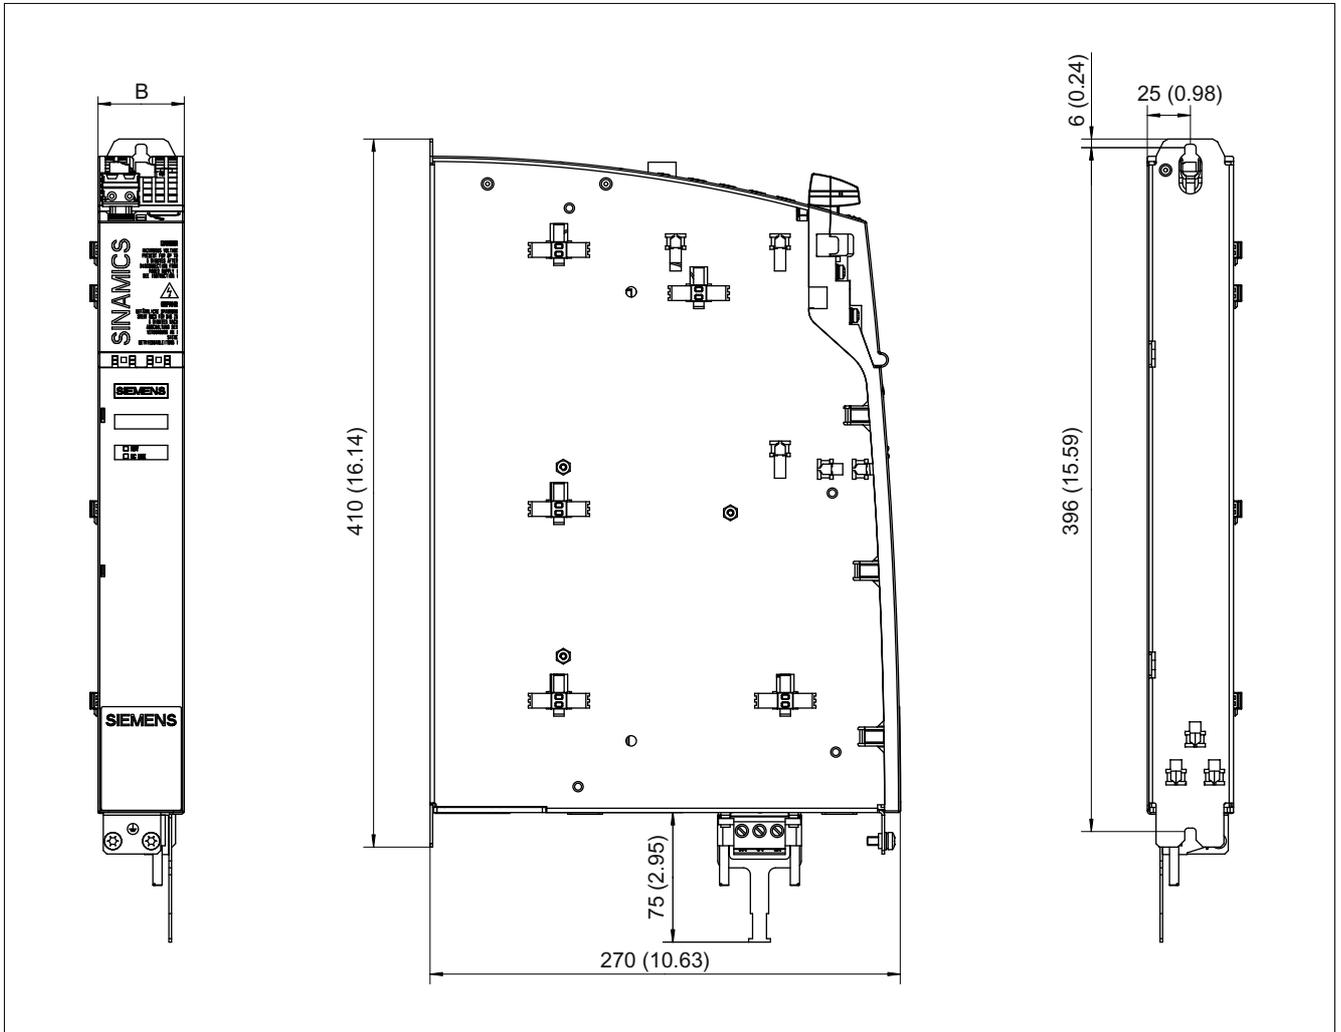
Dimension drawing of Smart Line Module with internal air cooling (5 kW and 10 kW), all dimensions in mm and (inches)
